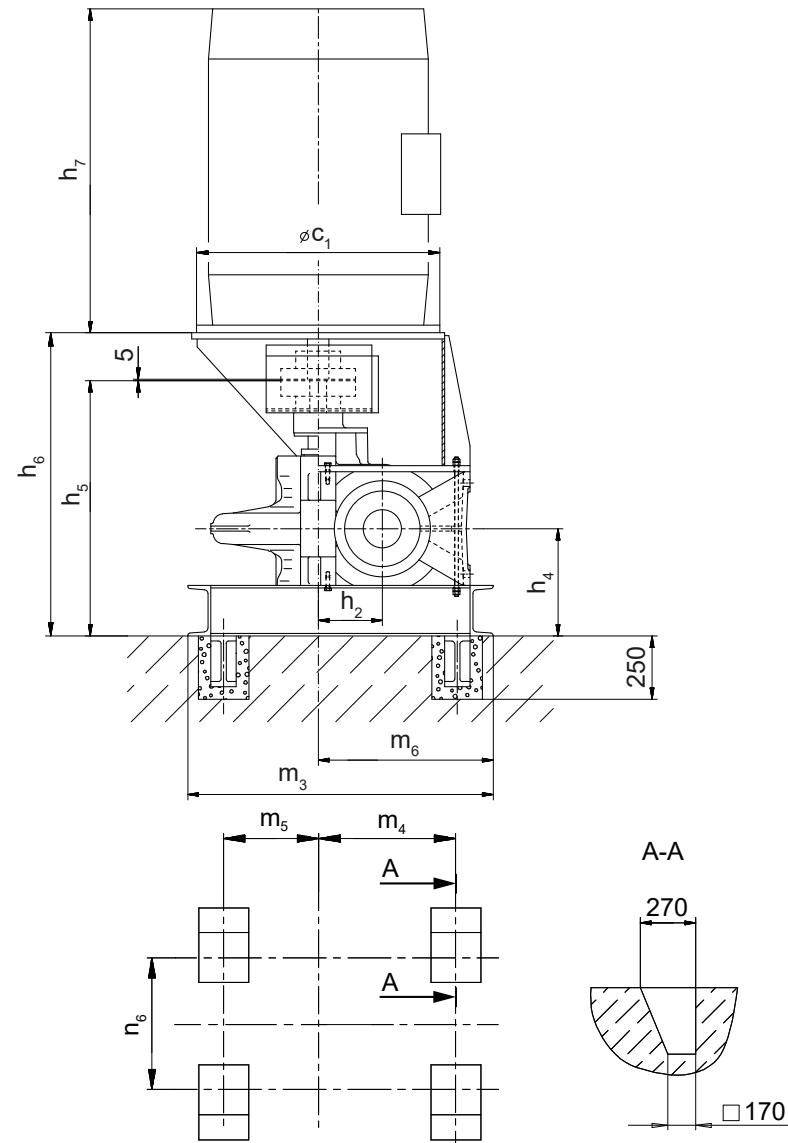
DB installation (4 foundations bolts), dimensions in [mm]
